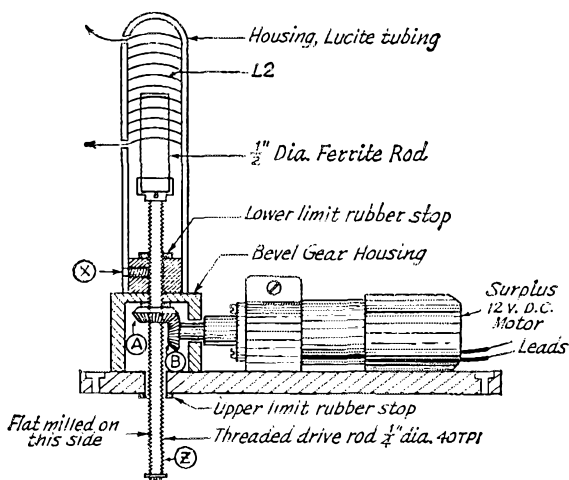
The remote variable-inductor assembly. The threaded drive rod, Z, has a flat milled its full length and is prevented from rotating by means of a nylon set screw at X. The hole in bevel gear A is tapped for $\frac{1}{4}$ -.40 threads per inch and mates with the drive rod, Z. Energizing the motor drives bevel gear B, which in turn drives the "captured nut" bevel gear A, raising or lowering the ferrite rod inside L_2 .
